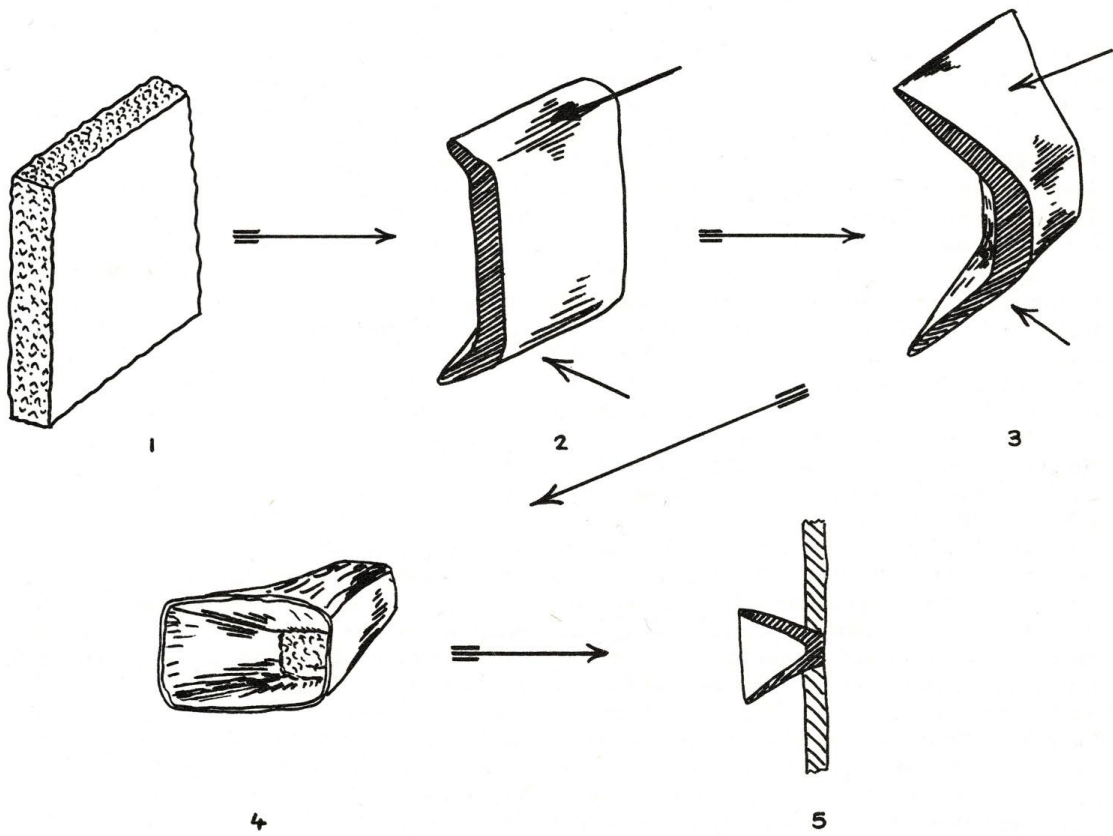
Stages in the manufacture and assembly of a tanged chaplet.
